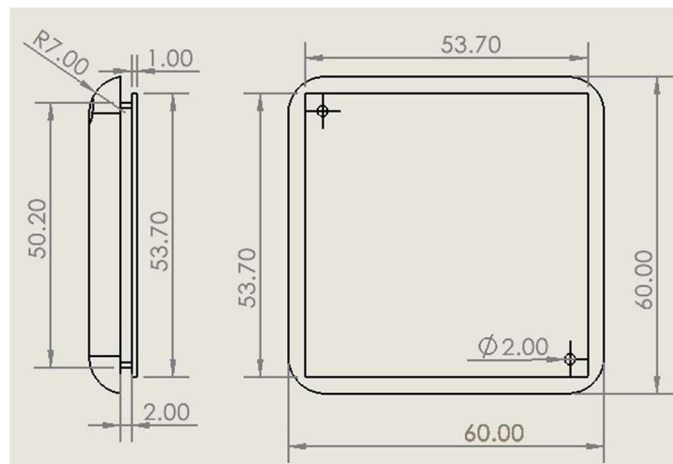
Blueprint for the back cover, back side of the pendant, and screw holes
